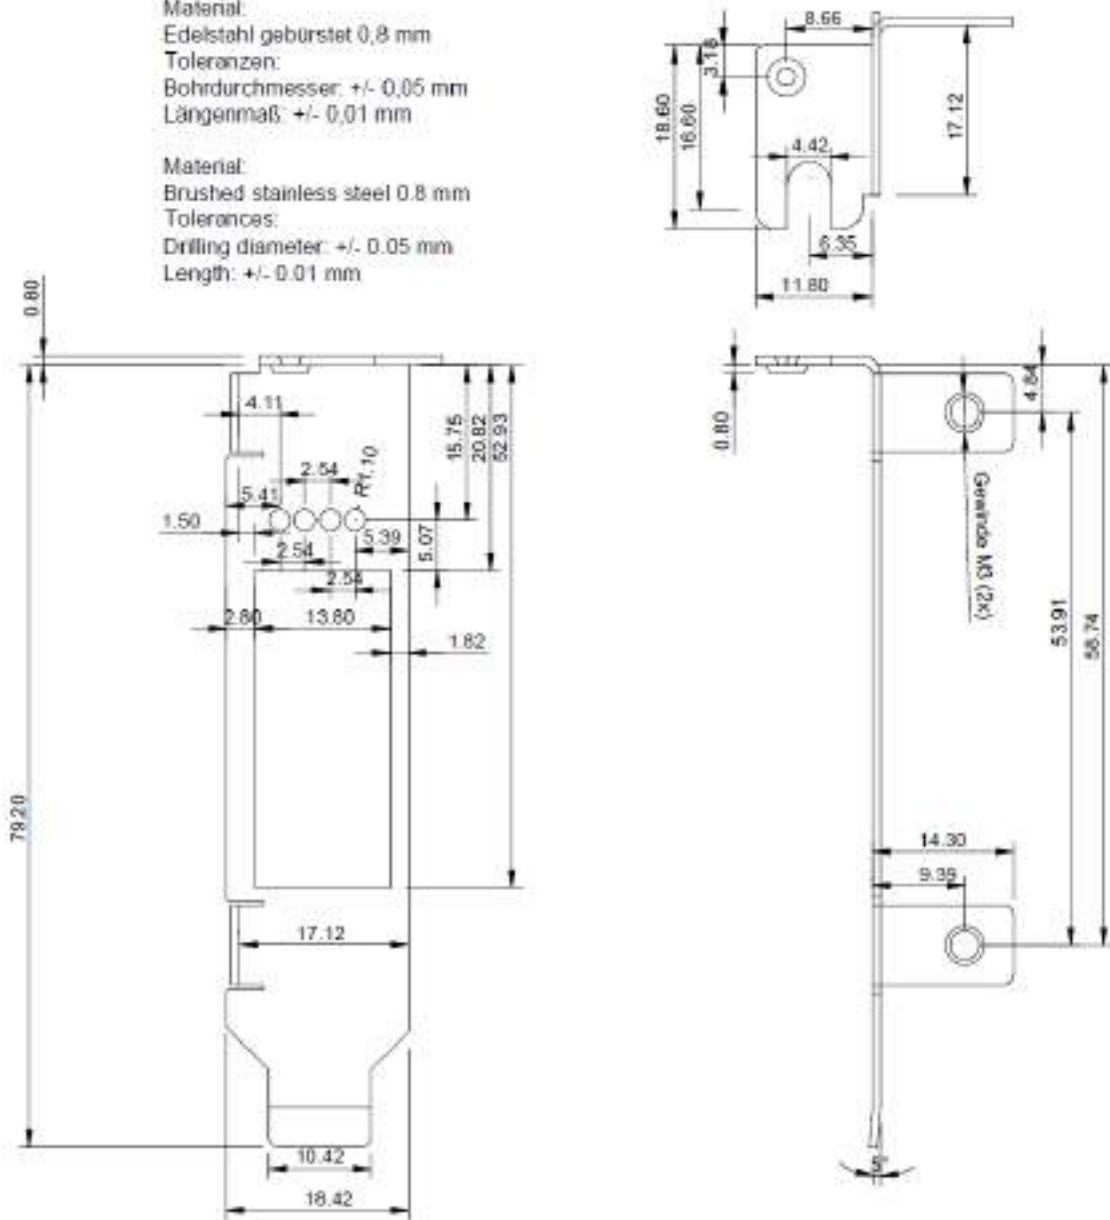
Dimensions Front Panel für CIFX 70E-RE, CIFX 70E-RE\MR
